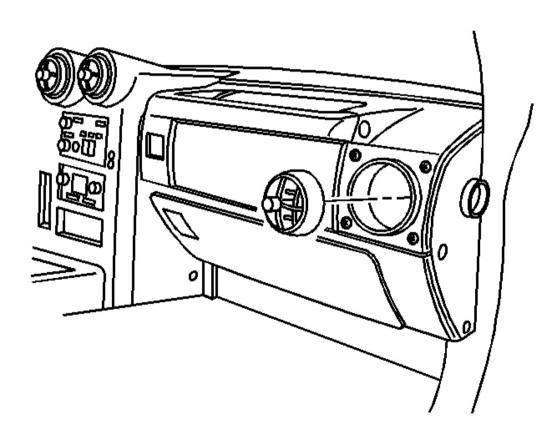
Air Reflector Louver & Trim Panel Courtesy of GENERAL MOTORS CORP.
